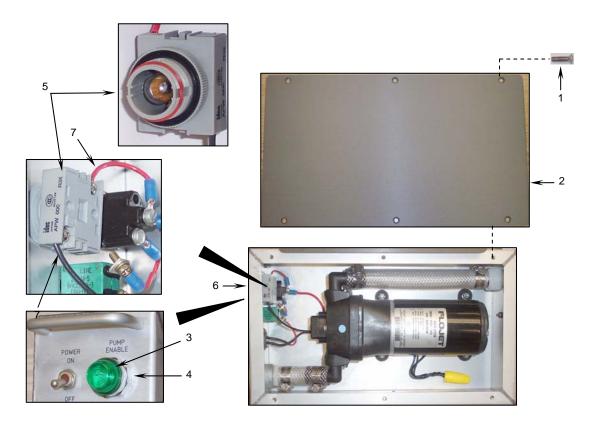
Removing the Sink Fill Pump Assembly Indicator Light Assembly.
